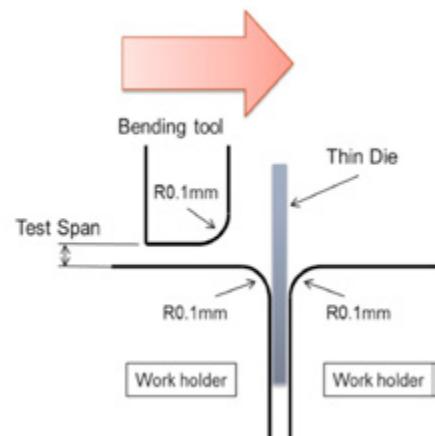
Illustration of a thin die held in a work holder ready for load to be applied during the cantilever bend method.
